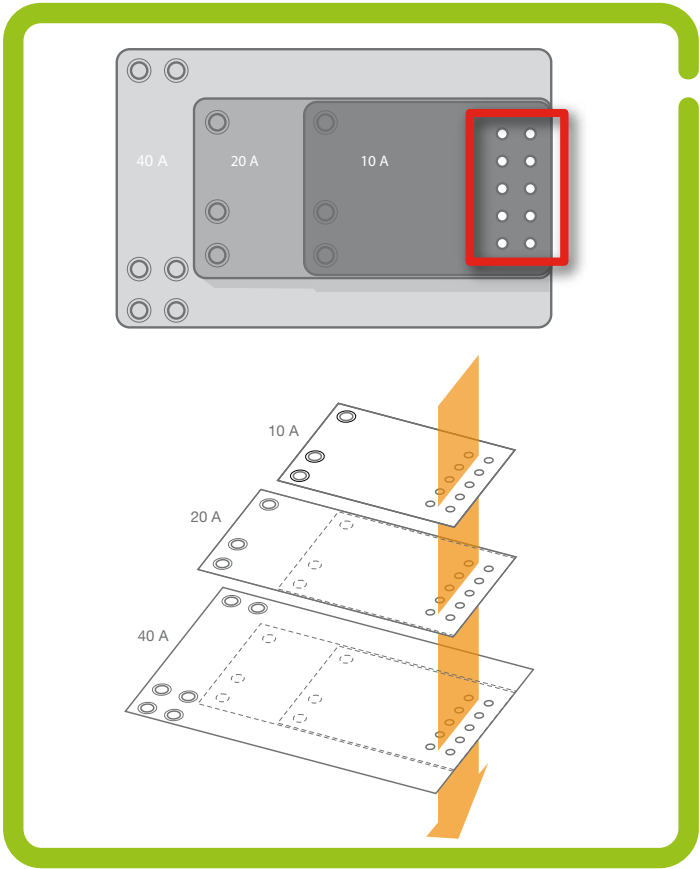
The scalable footprints of the 3E POL regulators permit a single PCB layout to accommodate any of these products.
